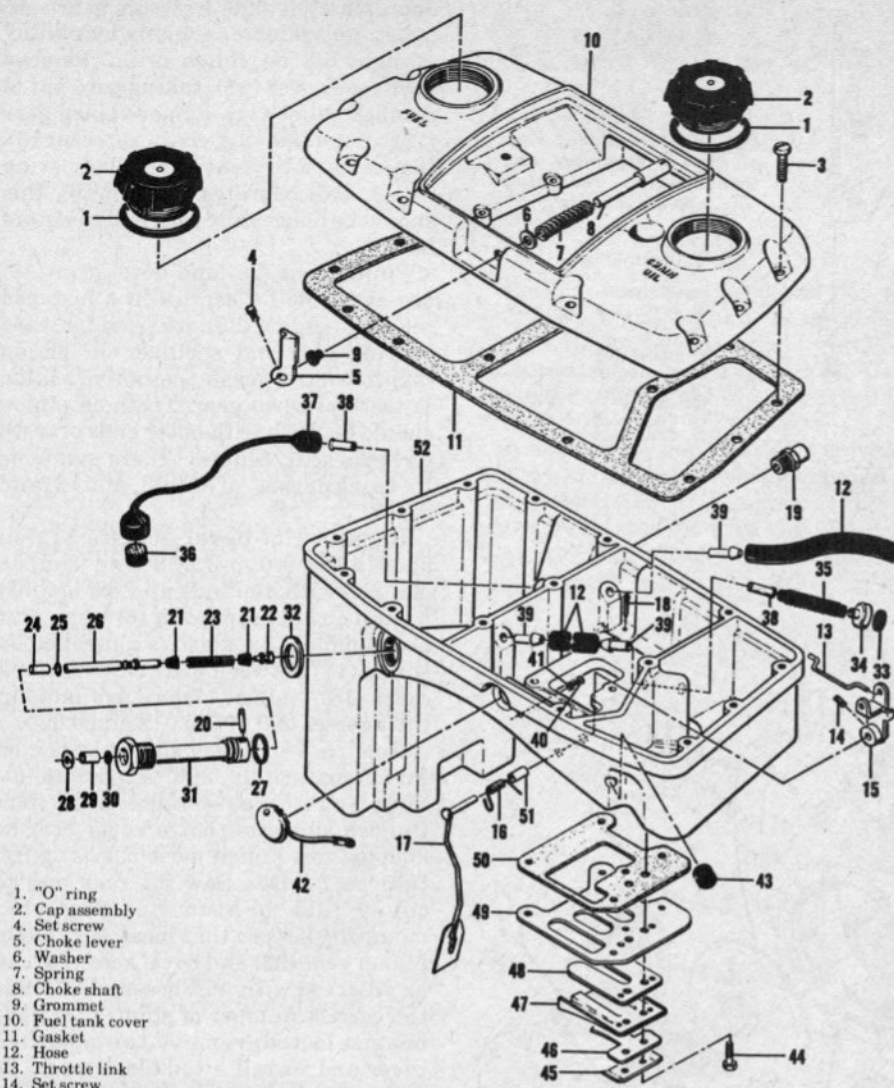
Exploded view of Model 940 fuel tank assembly and related parts.
